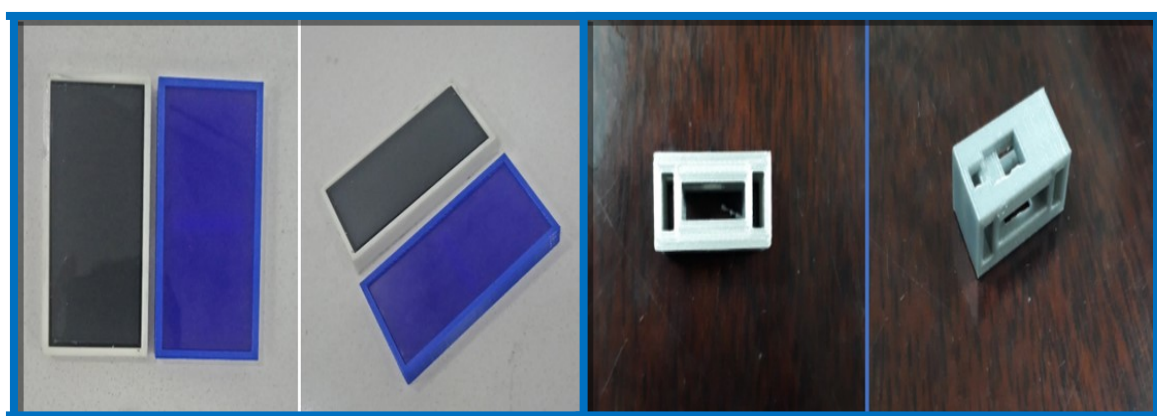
Real-time images showing the: (a) 3D printing of casing for molding and casting of Ecoflex/MoS₂ composite film (b) 3D design of LED-LDR assembly package.
